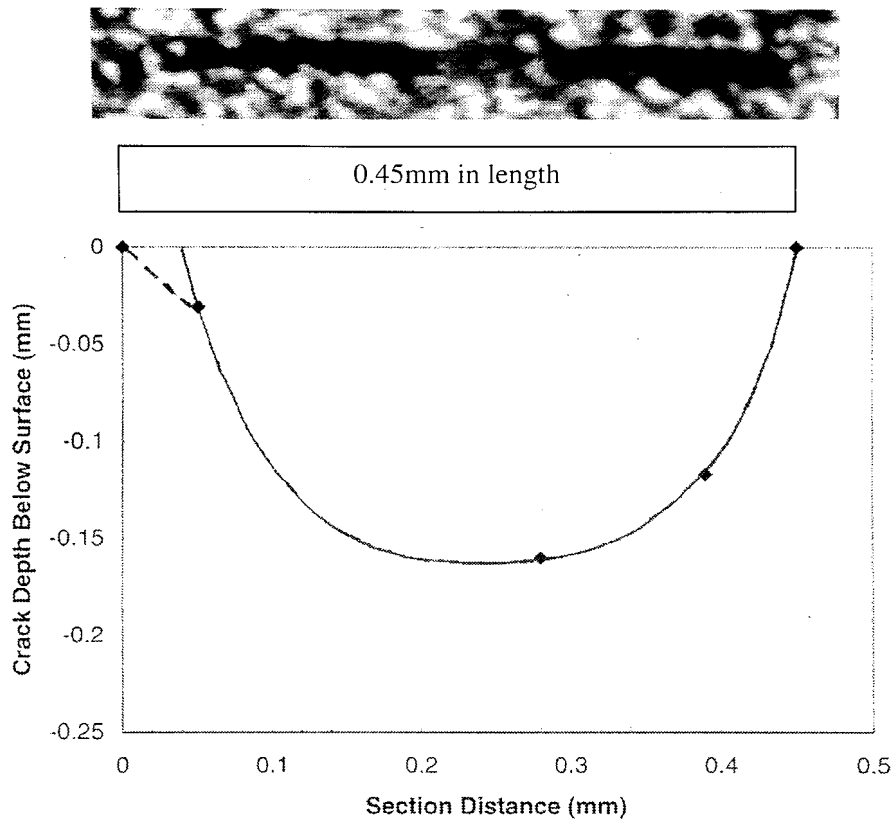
Constructed profile showing the growth trend for Crack #3 in hole #32 on panel B3-2-6. Crack #3 is a single, isolated crack.
